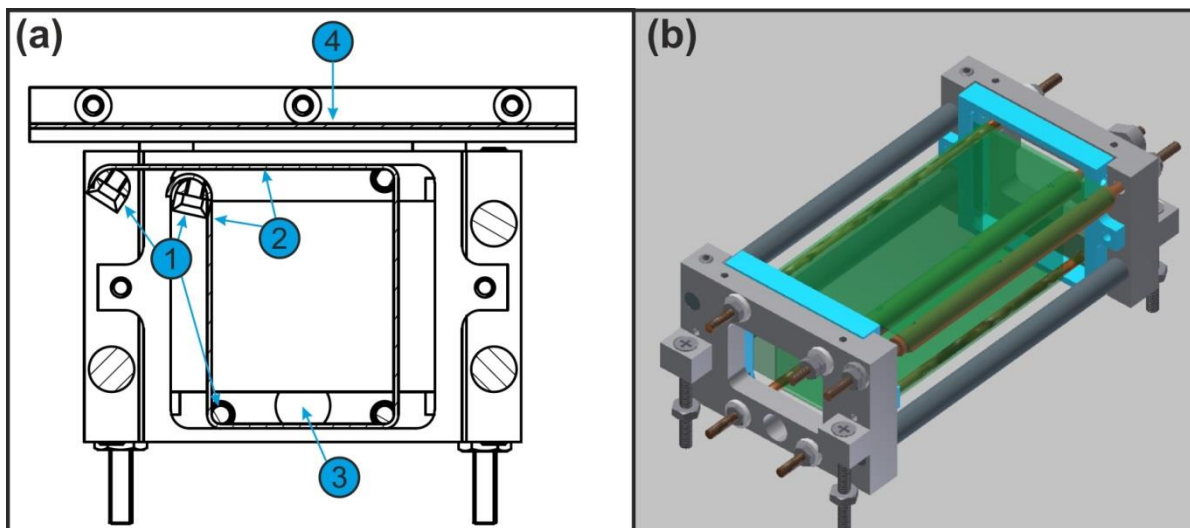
Drawings of the faraday cage assembly. Panel (a) gives a cross-section including indicators for the important parts: Marked with (1) are the metal rods fixing and forming the long mesh (2) into a cage. The ionization spot is marked with (3), and the ions have to pass through the initial cage as well as an additional shielding mesh (4) mounted on top of the assembly. Shown in panel (b) is a perspective view of the assembly, with the meshes in green and the metal rods in brown. An aluminum frame (grey) fixed all parts and the length of the cage was adjusted by separate rods (dark grey).
